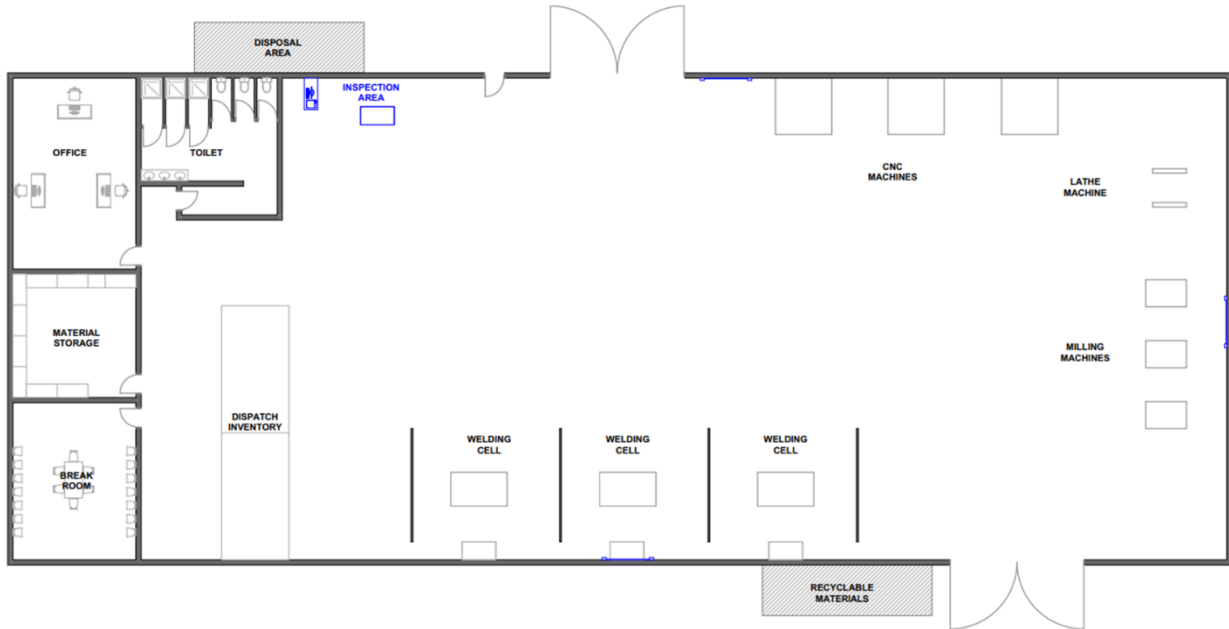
Fabrication floor plan layout with kanban centralised communication features
